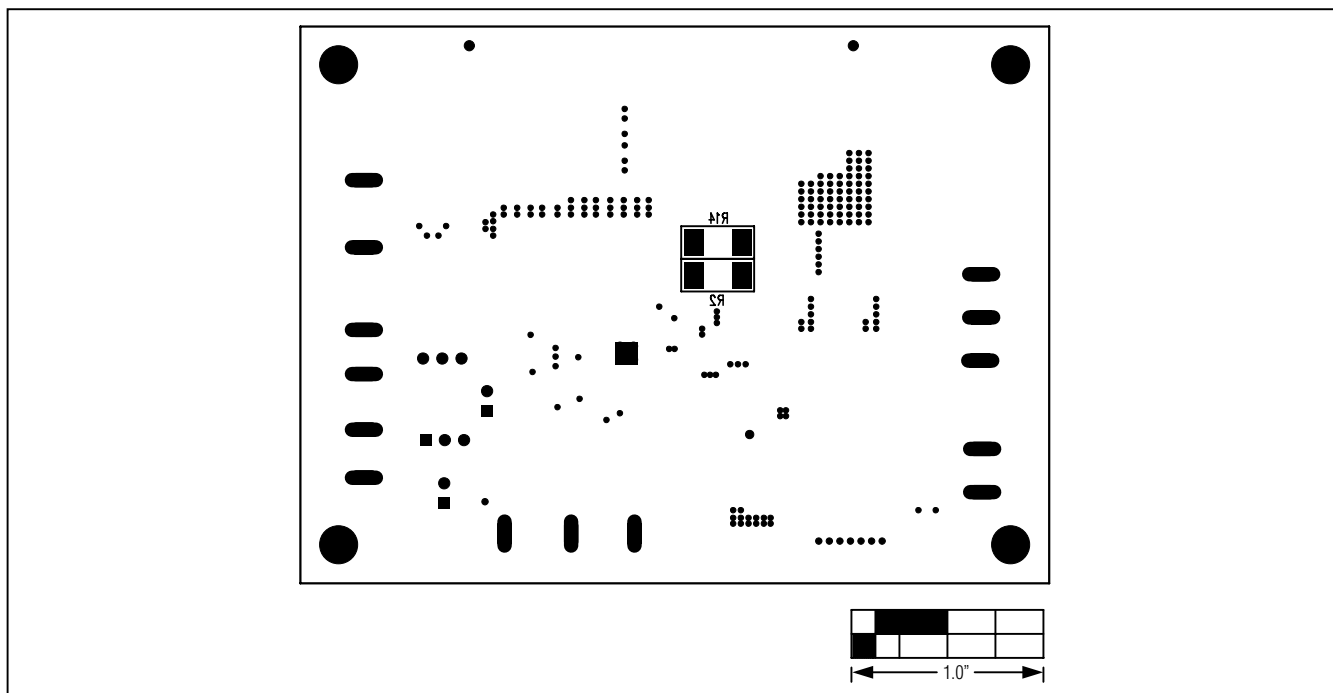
MAX16833 EV Kit Component Placement Guide—Solder Side
